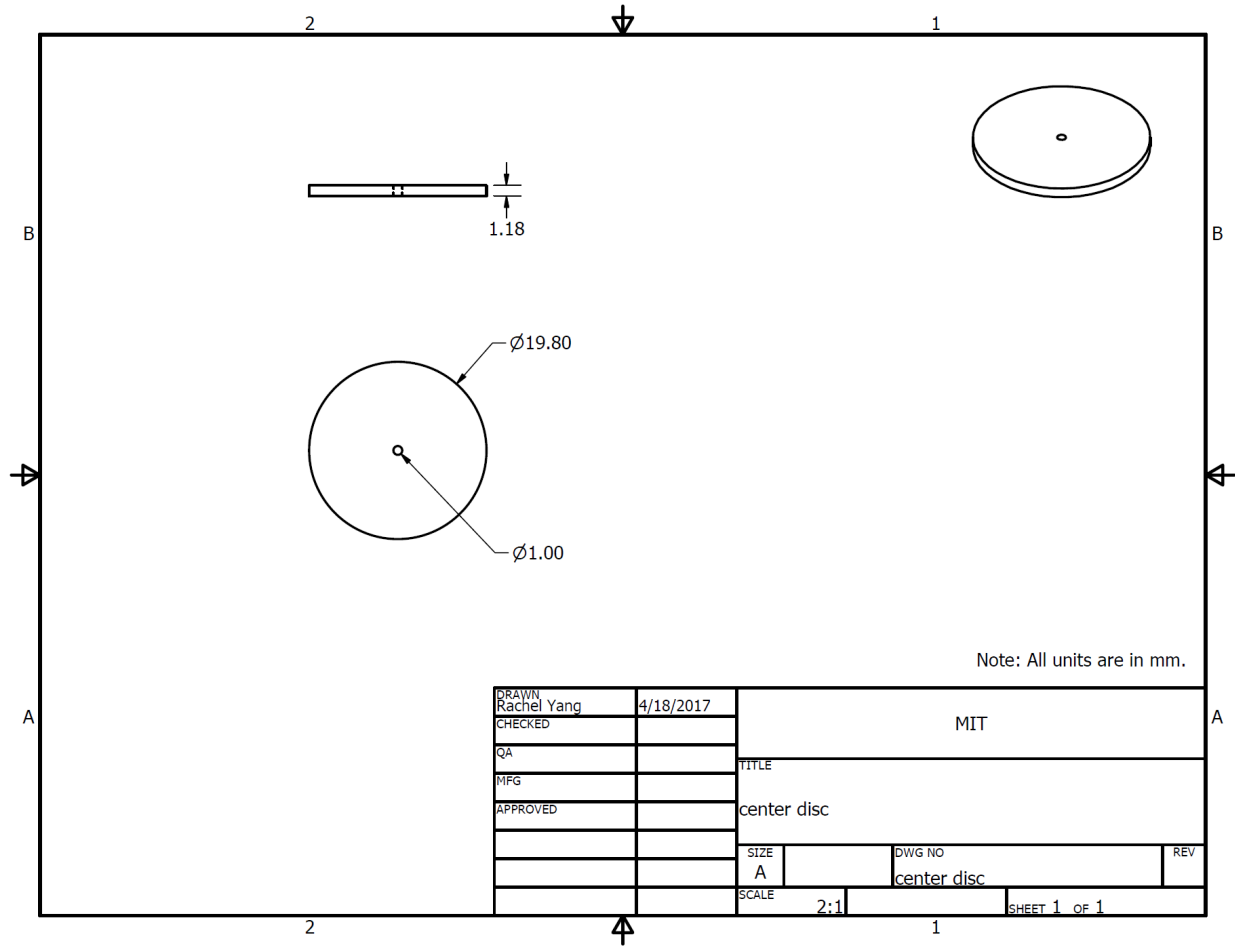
CAD drawing of the manufactured core disc part for the center post
